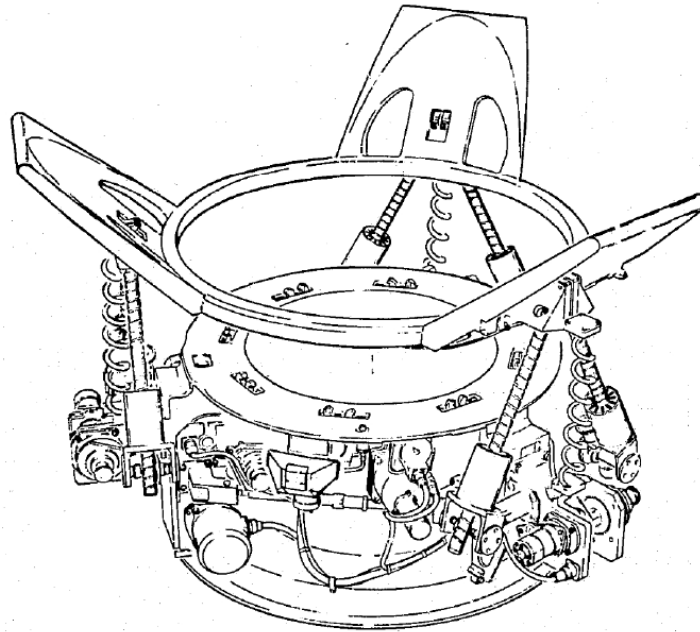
Technical drawing of the flight model of the Soviet half [21]
